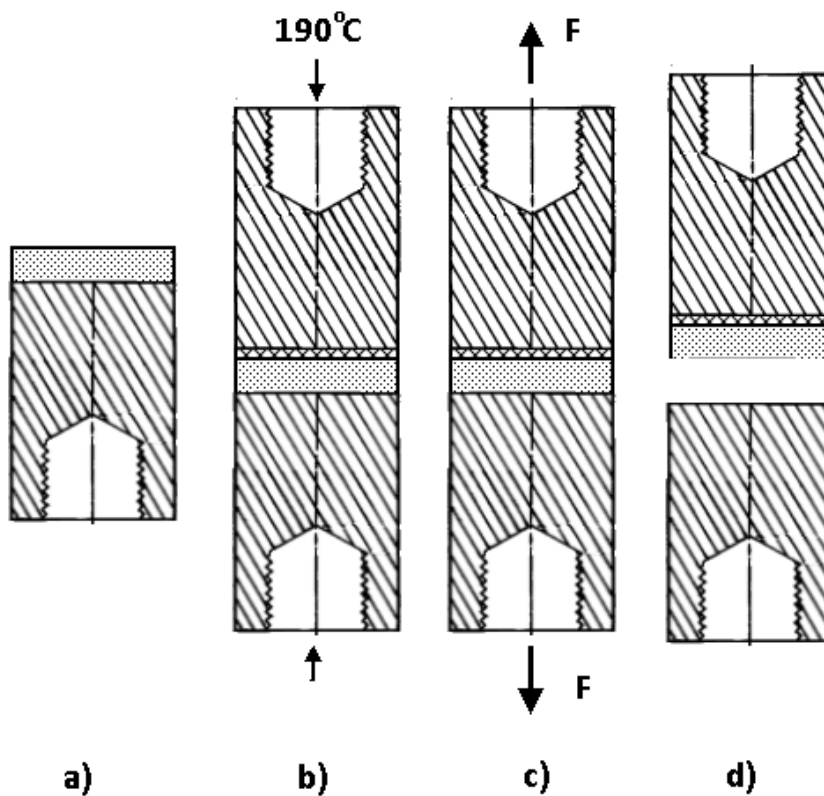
Preparation and Execution of a Tensile Test ASTM C-633. a) Coating is Produced on a Bond Plug b) Second Bond Plug is Glued onto the First c) The Assembly is Installed and Pulled in an Instron Machine Until d) the Coating is Removed from its Original Substrate
